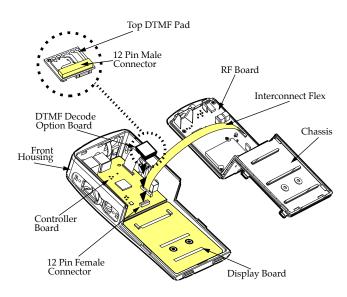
Exploded View of the Radio with DTMF Option Board
